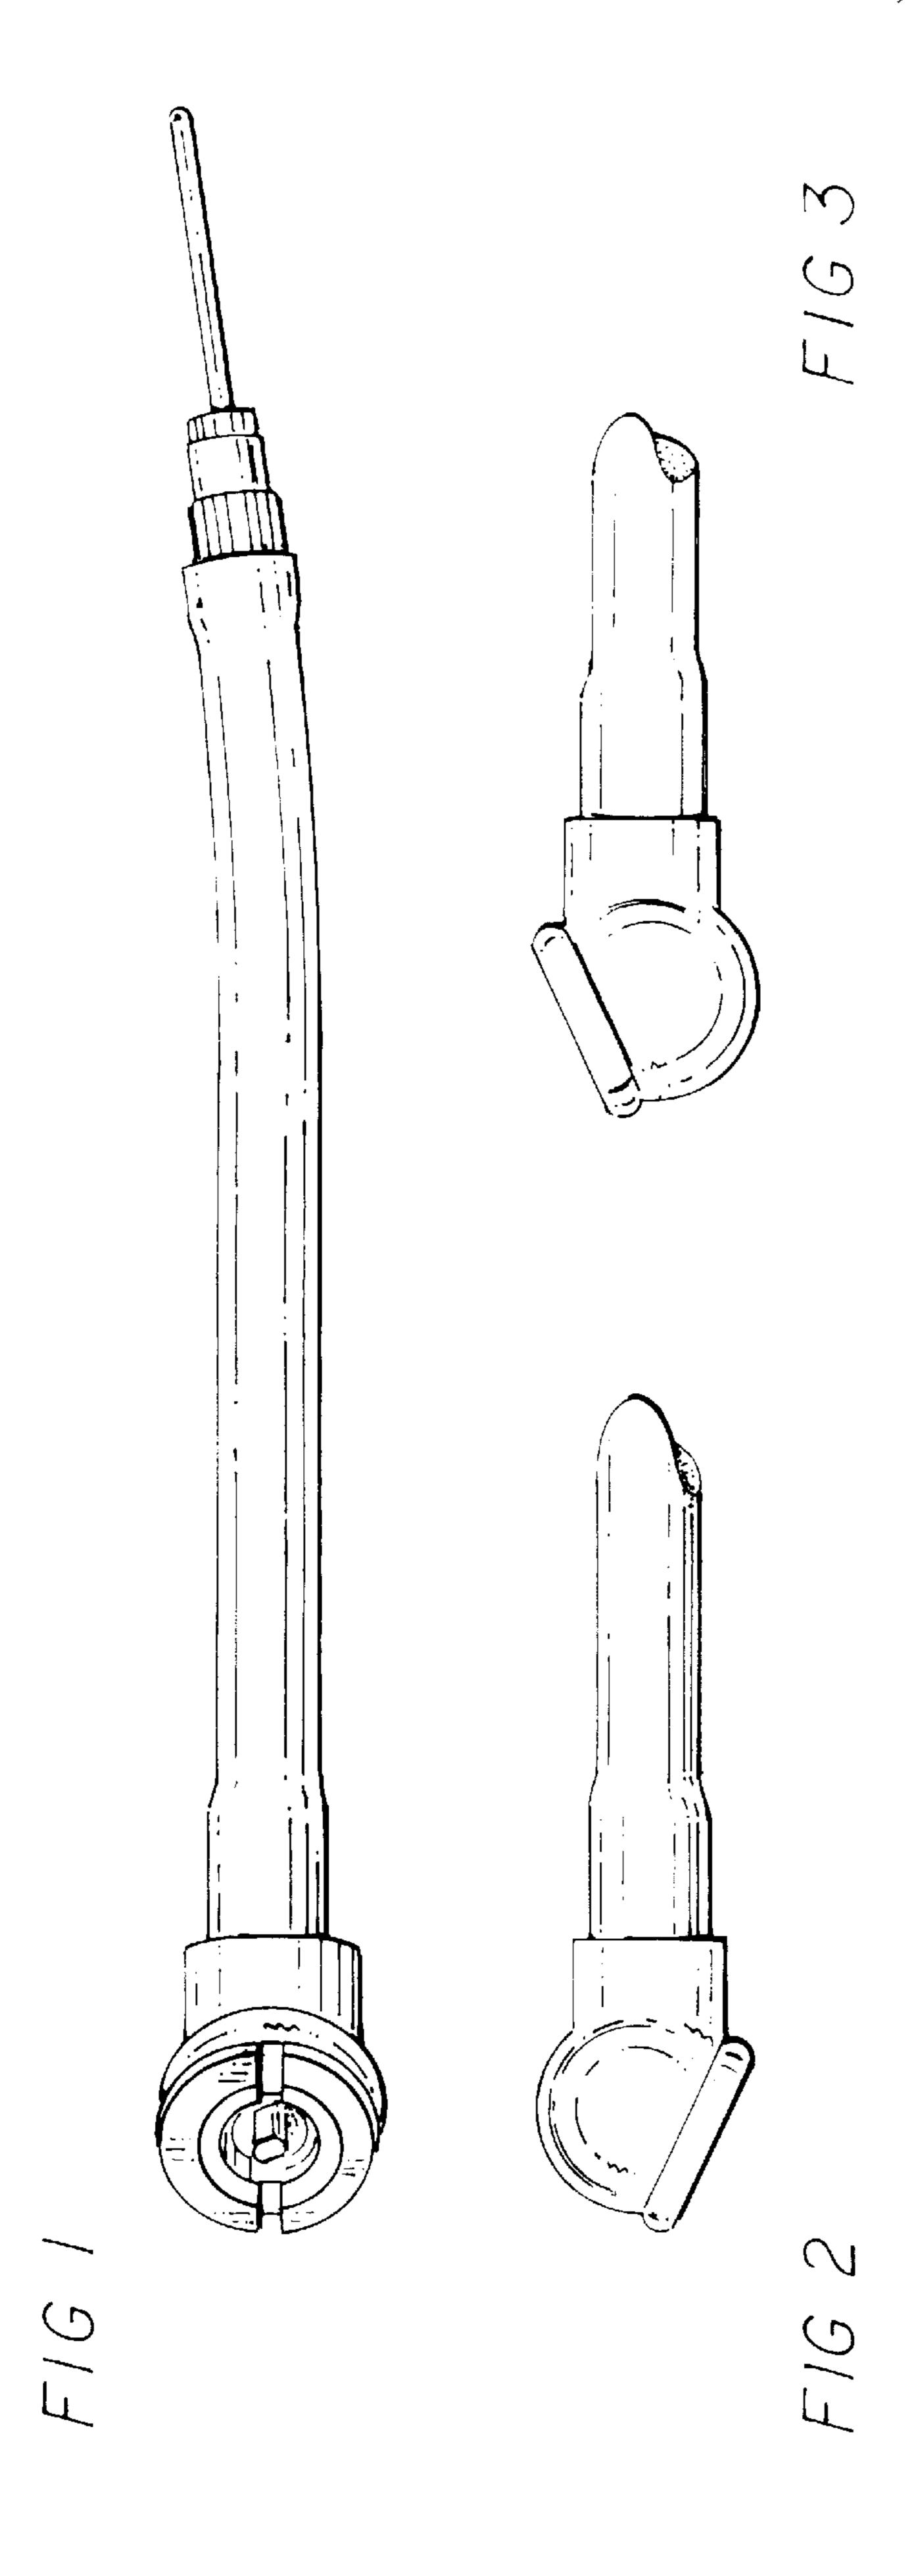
is a fragmentary view illustrating one side of the part of my inflation device concerned with engaging the valve stem of a tire;
